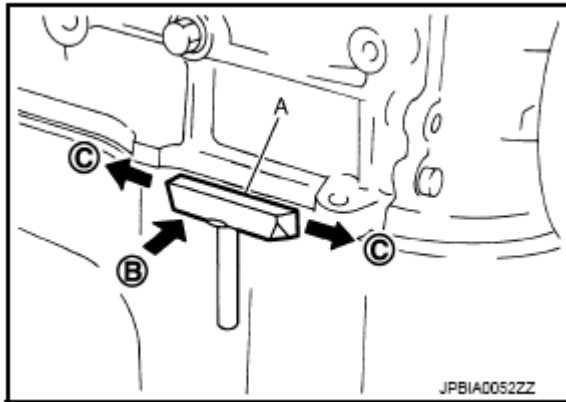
Removing Liquid Gasket Using Seal Cutter
